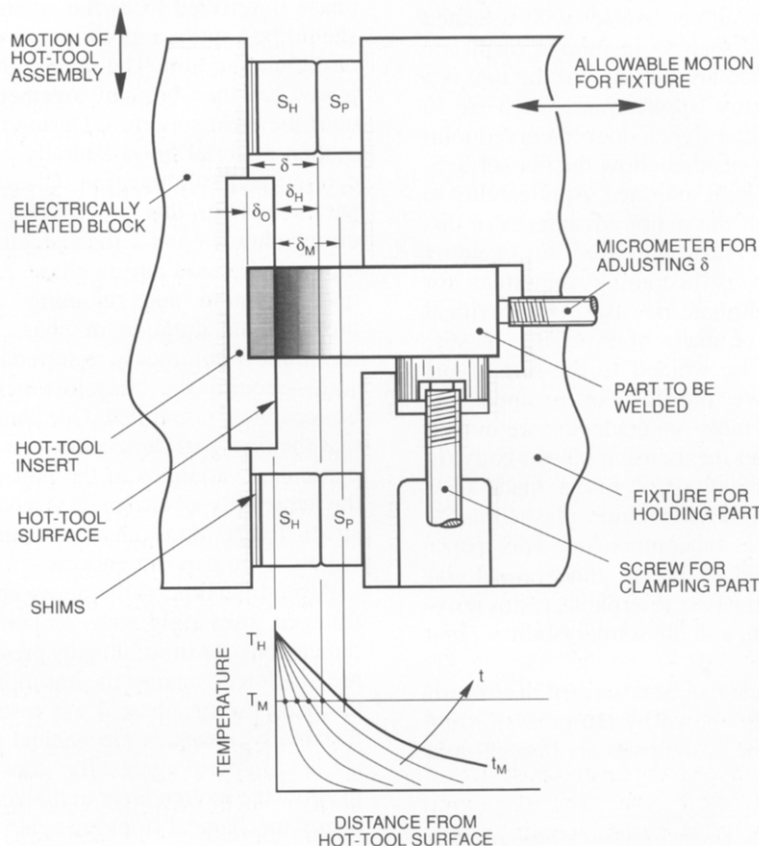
Schematic diagram showing geometric parameters for displacement-controlled hot-tool welding using mechanical stops
